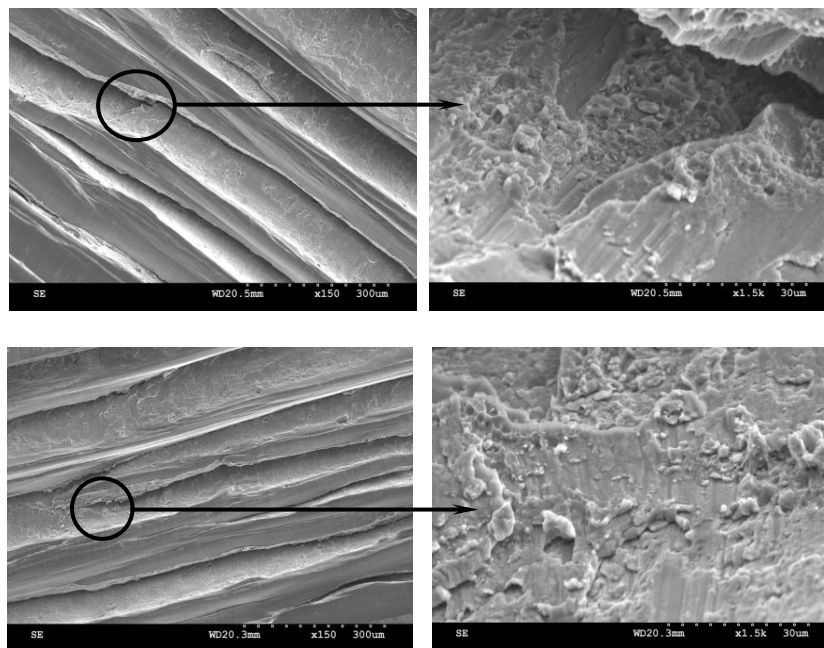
Shearing zone which produces dust at the cutting speed of 300 m/min and feed rate of 0.15 mm/rev for dry machining of aluminum alloy 7075-T6
